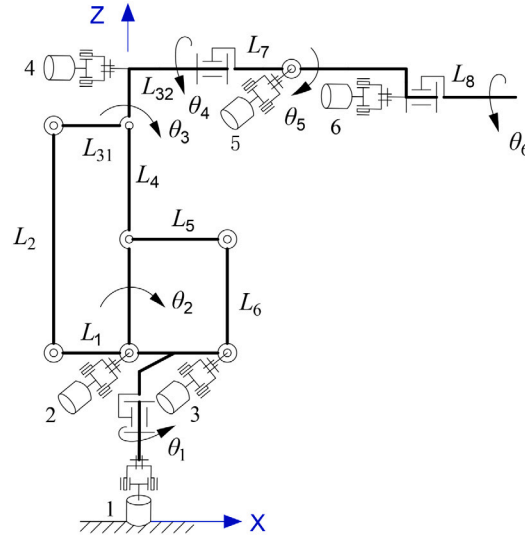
Structure of the hybrid welding manipulator.
